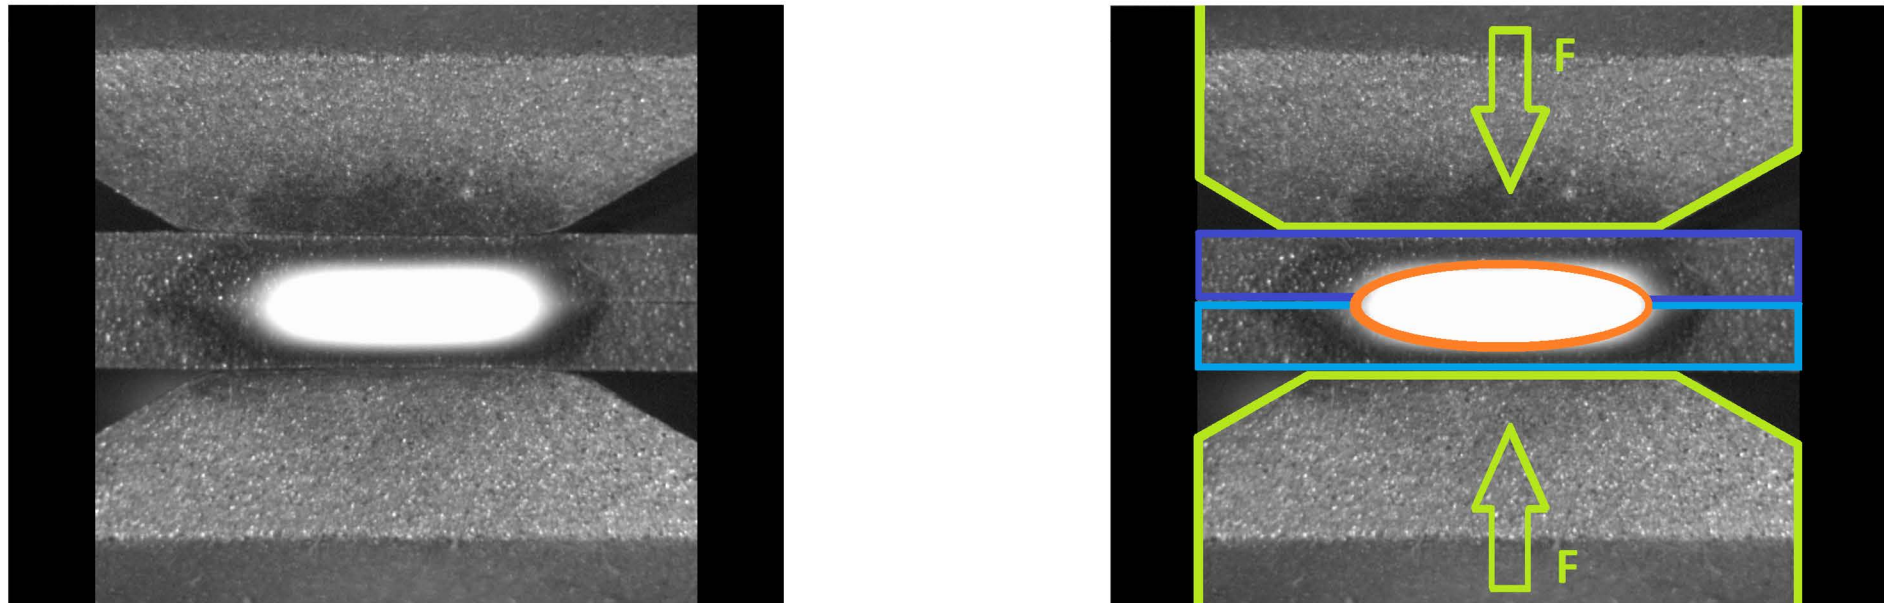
Cross-section of a welding nugget. Right: annotated cross-section with the electrodes (green) pressing the two metal sheets (blue) together. Electric flow generates heat, which melts the sheets. The welding nugget (orange) is formed.
